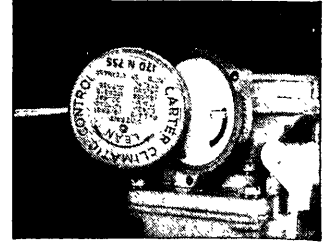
Install therm static coil and housing. Install housing with indicator marks at bottom. Revolve housing clockwise and set index mark as stated in the Automatic Choke chapter, then tighten attaching screws
